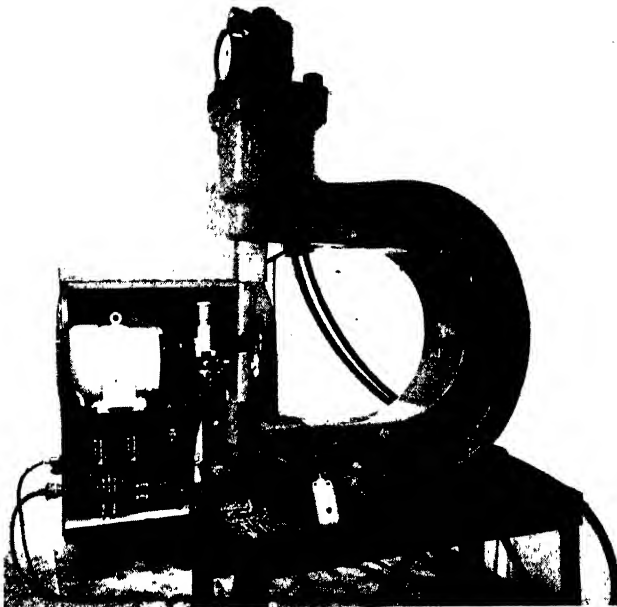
A 30-TON PORTABLE BEAR-TYPE RIVETER POWERED BY AN ELECTRAULIC TANK-MOUNTED AXIAL-PLUNGER PUMP
